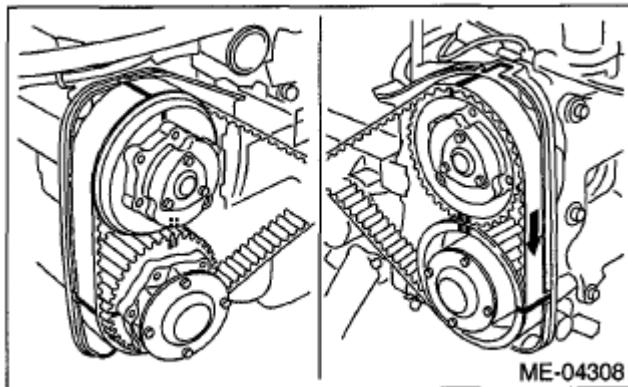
Identifying Timing Belt Crank Sprocket And Cam Sprockets
